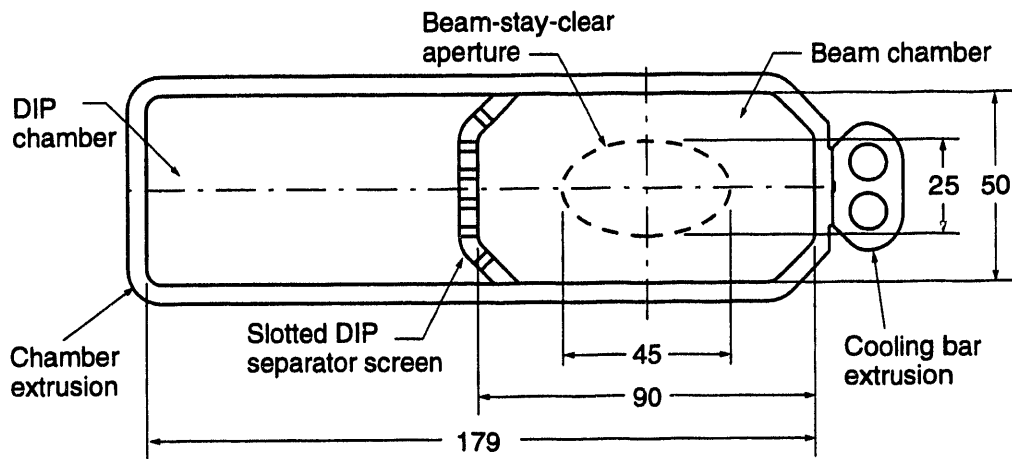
HER vacuum chamber cross section at a dipole; dimensions are in millimeters.
